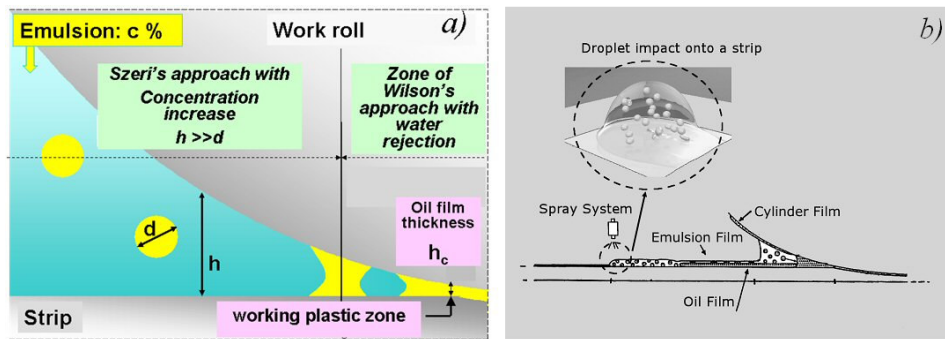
a) Dynamic concentration mechanism. b) Strip plate-out mechanism.
